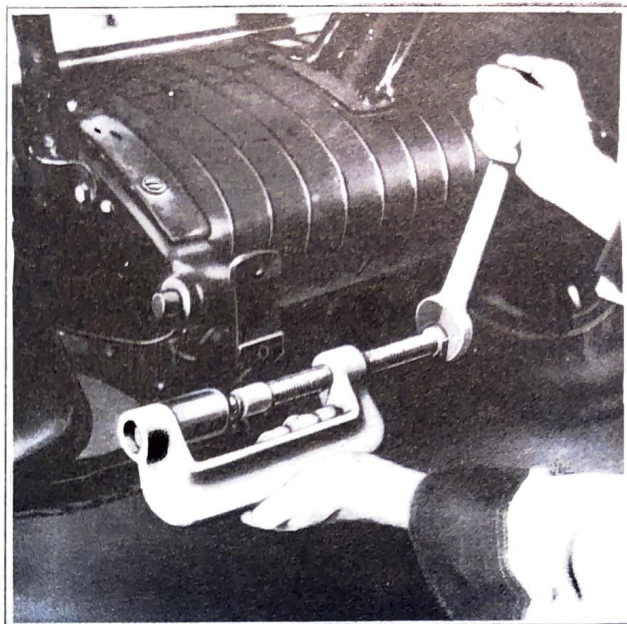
HM-490 Tool for Removing Shackle Bolts in Front End of Front and Rear Springs
